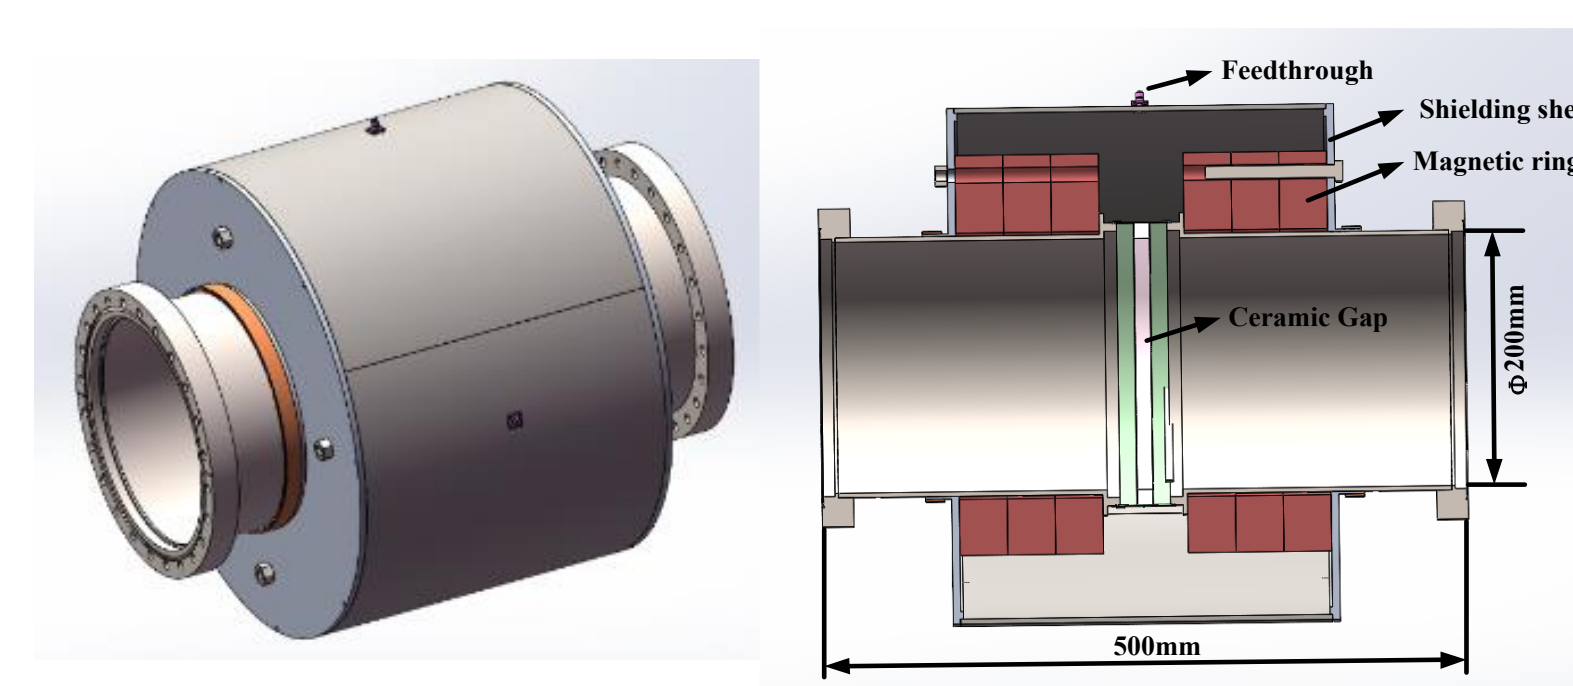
Three-dimensional drawing and cross-sectional view of the mechanical structure of WCM
